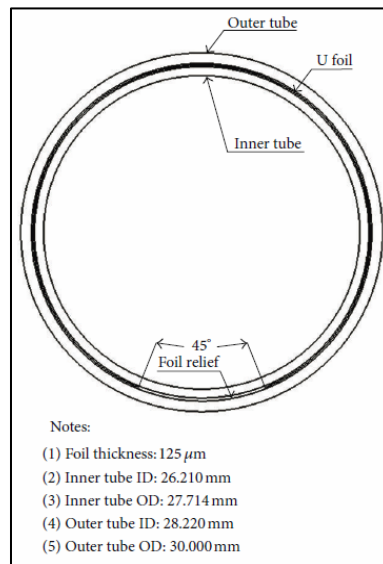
Drawing of the geometry in the first analysis step of the assembly simulation model.
